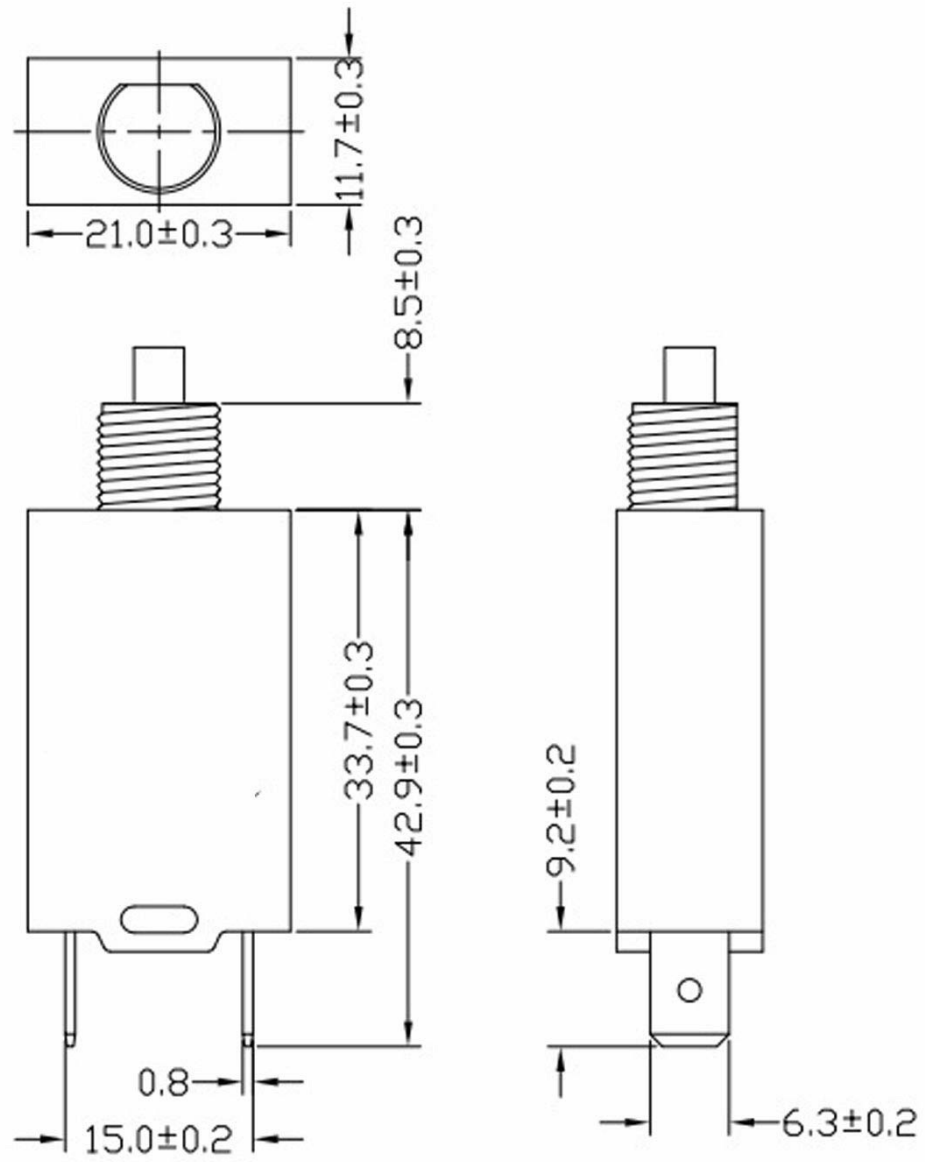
Technical drawing providing detailed dimensions of the KEDU RB2 switch, including overall length, width, and terminal spacing.
